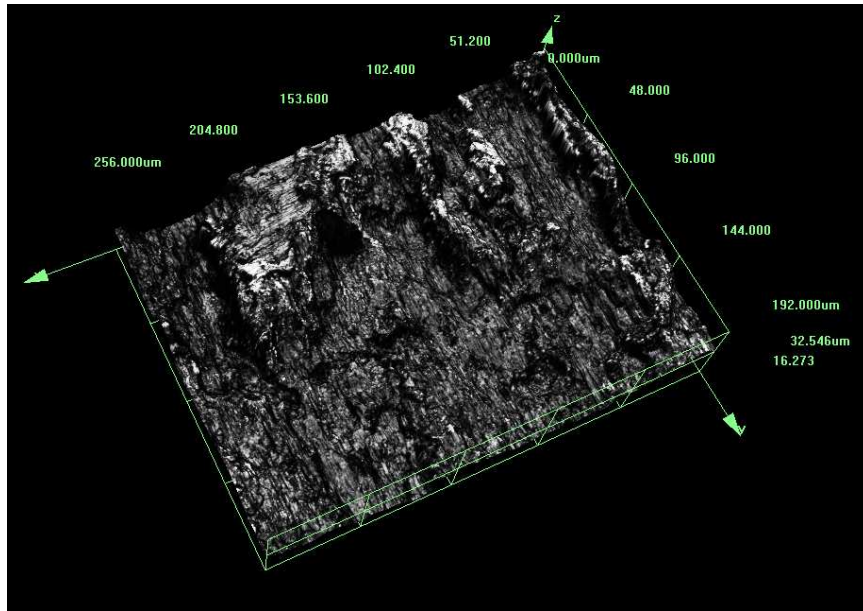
Three-dimensional view of fracture surface from shear test sample.
